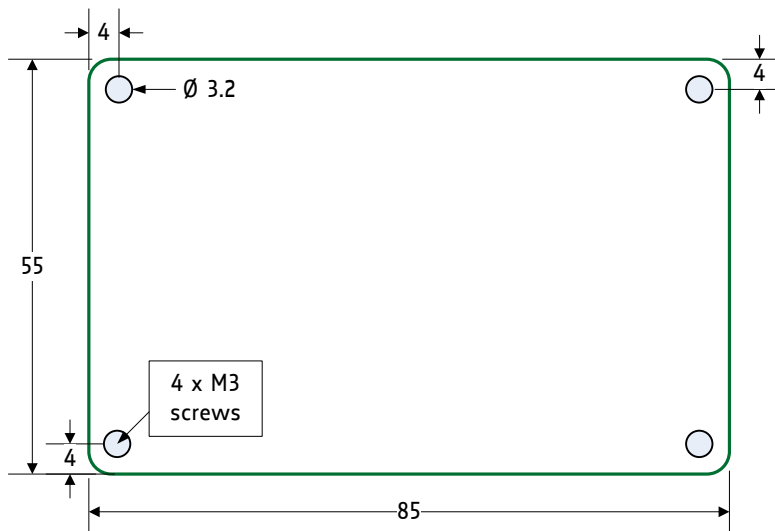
TMC4210+TMC2660-EVAL dimensions
